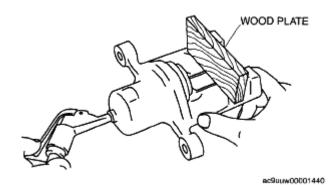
Compressing Air Piston Of Caliper Courtesy of MAZDA MOTORS CORP.
